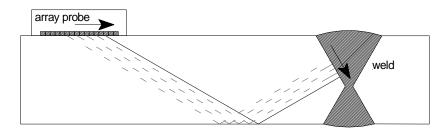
Diagram showing a fixed angle scan of a weld combined with an electronic linear scan to give increase weld coverage
